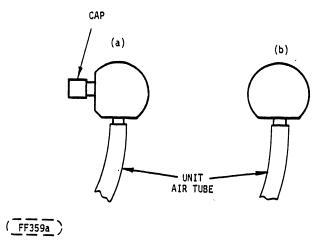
FILTER FITTING FOR PRESSURE SENSING TUBE
